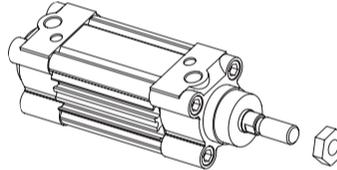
E: Cylinder mounting accessories are often sold separately to allow one cylinder to be used in a number of mounting configurations
